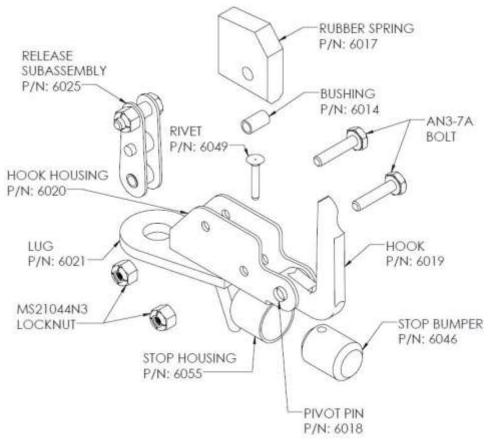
Tow Hook/Lug with Stop Exploded View, P/N: 6030
